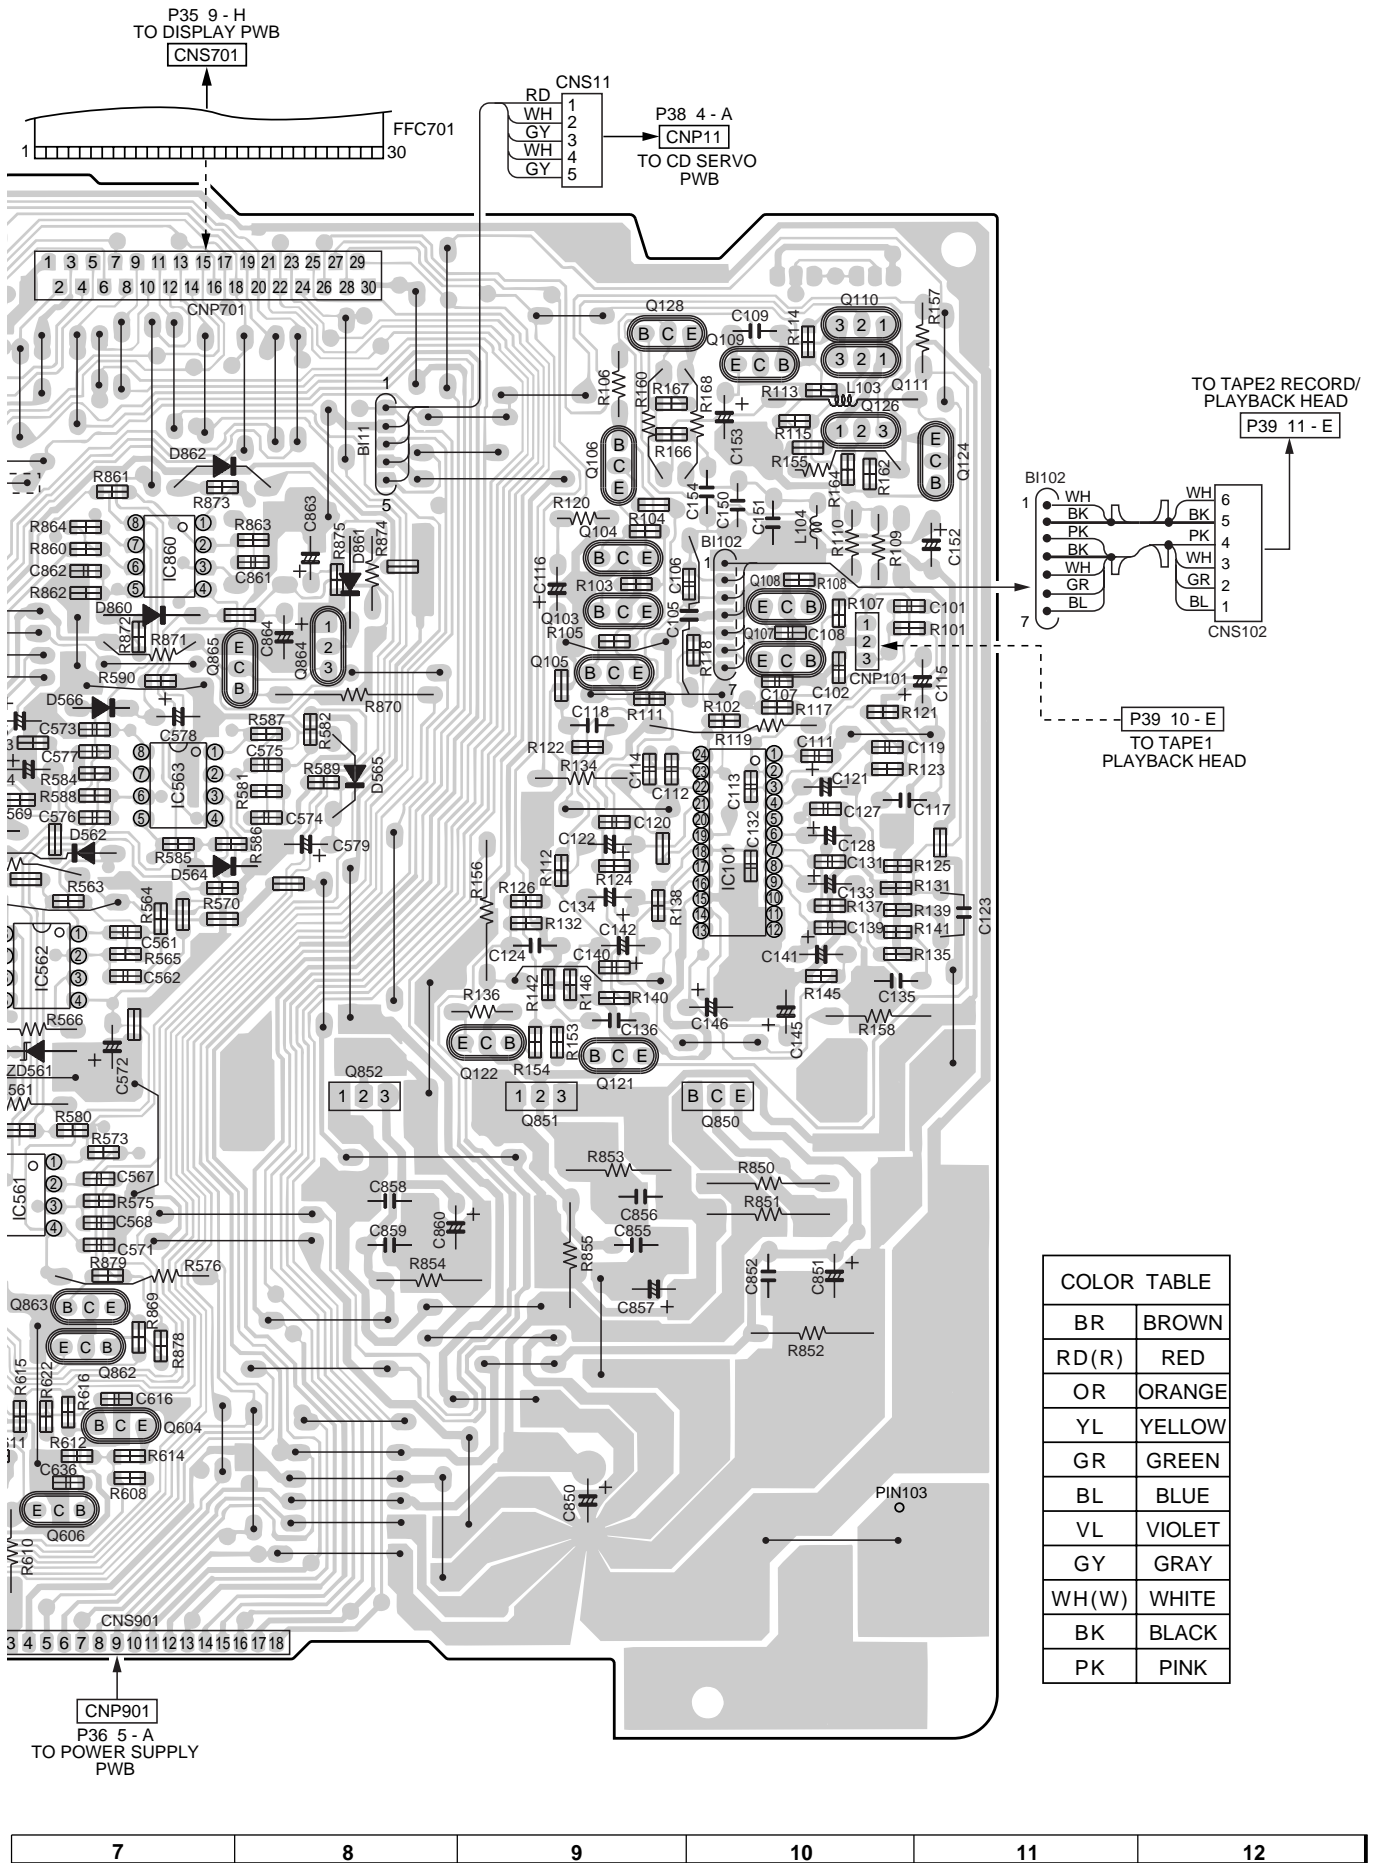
WIRING SIDE OF P.W.BOARD (2/8)
